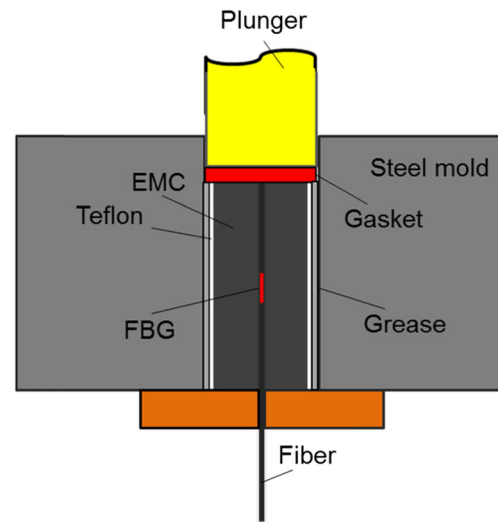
Schematic illustration of specimen assembly after pre-processing
